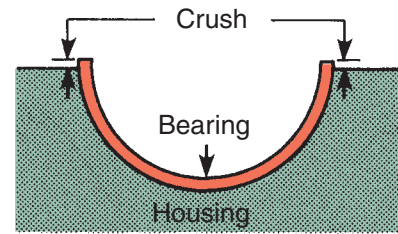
Crush ensures good contact between the bearing and the housing.
